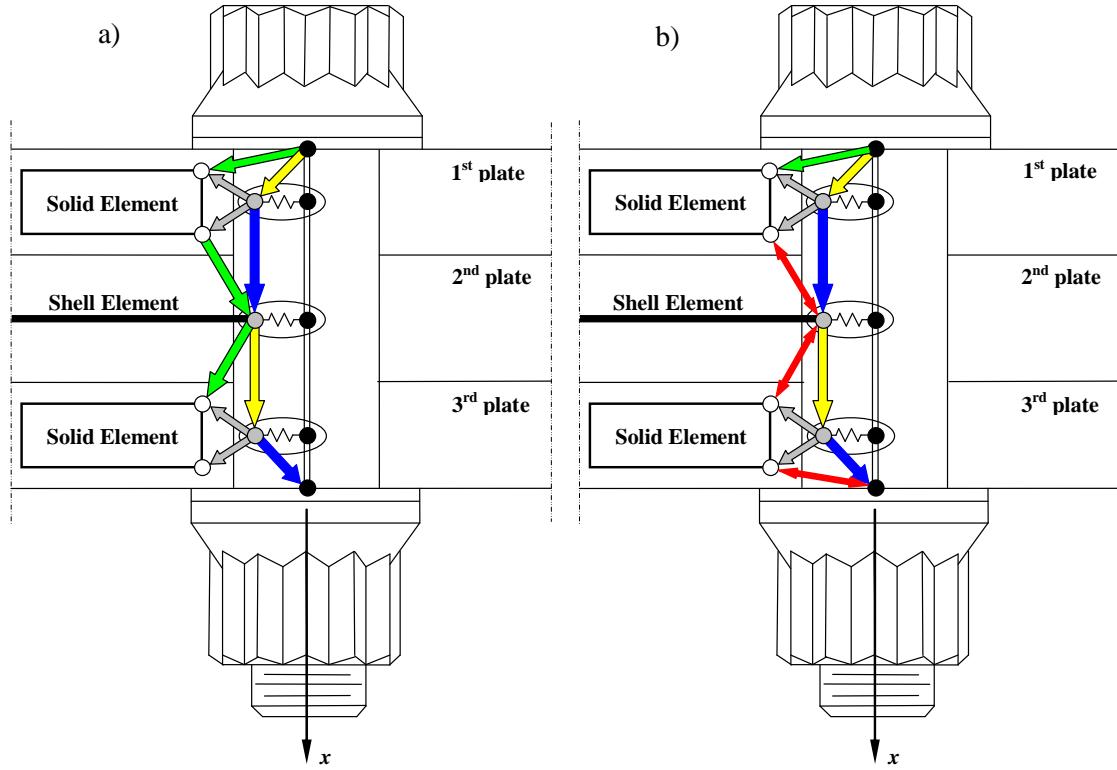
Model of a Fastener Joint Connecting Three Plates Modeled as Follows:
